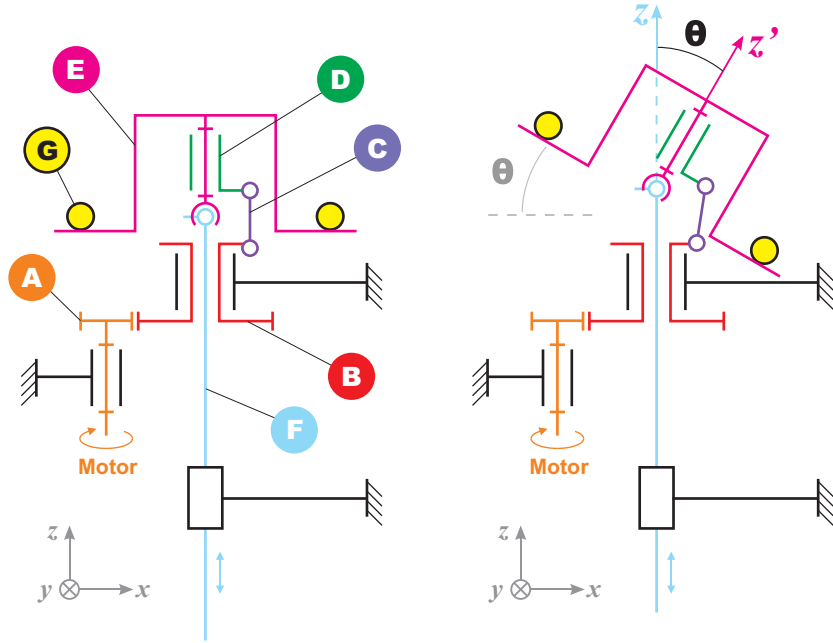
A simplified kinematic diagram illustrates the positions of assemblies of the 3RFL at the horizontal and inclined cases. A: Driveshaft / B: Rotor / C: Connecting rod / D: Slave rotor / E: platform / F: Central shaft / G: Torus tube.
